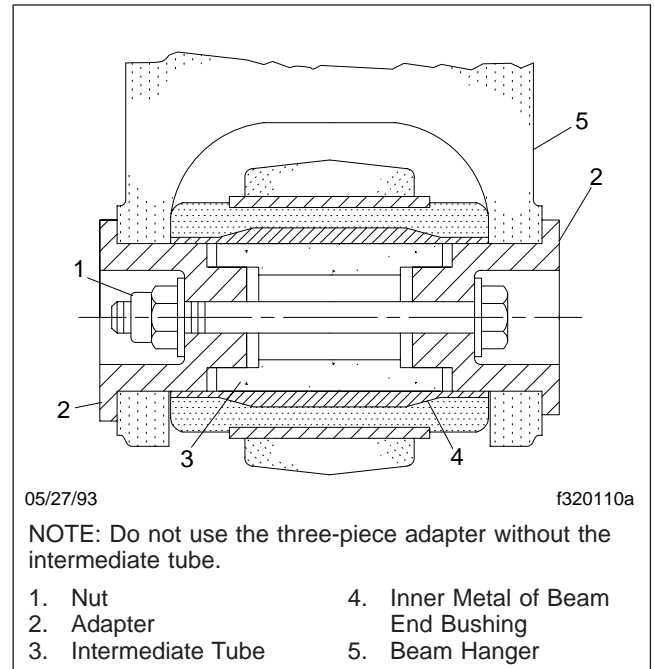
, Three-Piece Adapter-Type Beam End Connection
